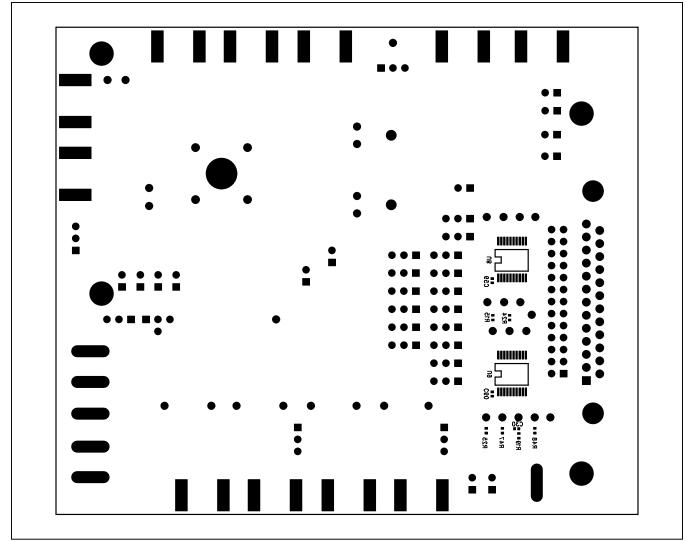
MAX2839 EV Kit PCB Layout—Bottom Silkscreen
